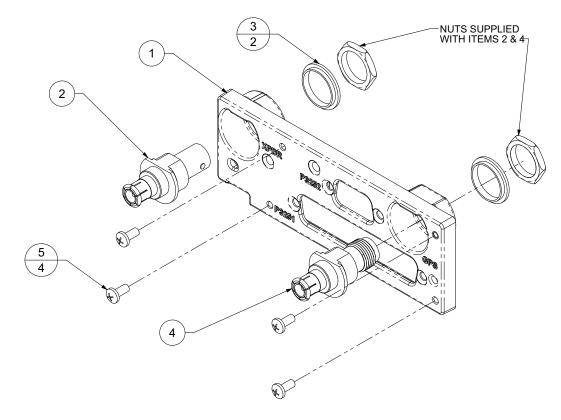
GTX 3X5 with GPS Backplate Assembly P/N 011-02976-01
